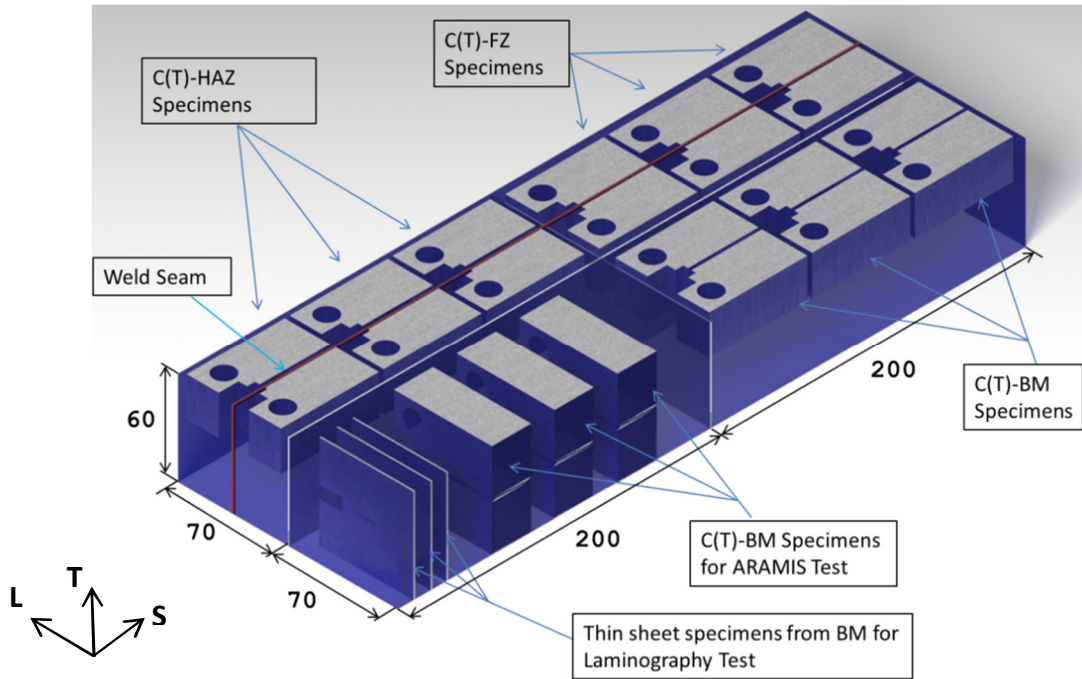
Sketch of extraction positions for compact tension (C(T)) specimens and thin sheet specimens from the S355 welded joints.
